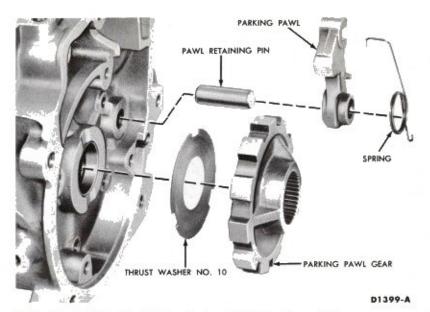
Parking Pawl Return Spring, Retaining Pin and Gear
